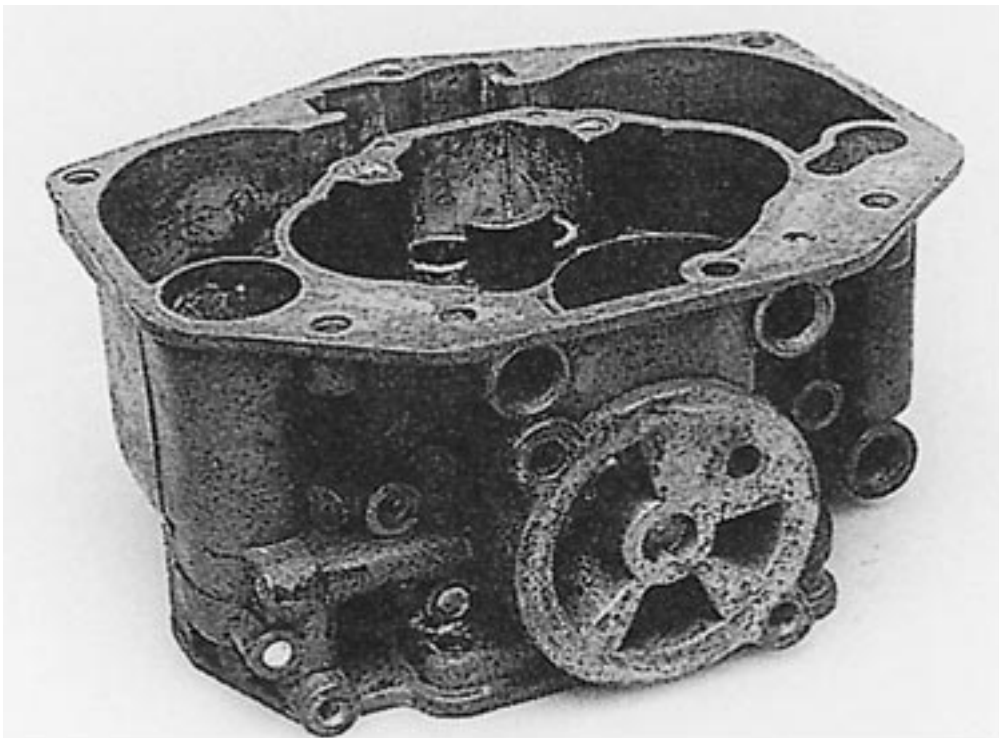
Zinc alloy carburettor body showing complex internal cavities
